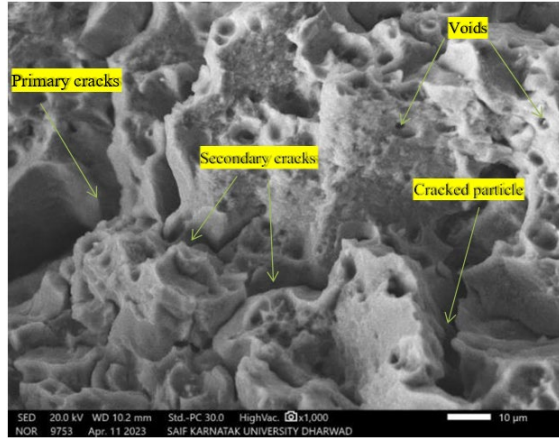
Fatigue fracture surface of Al 7075 at Smax=370MPa
